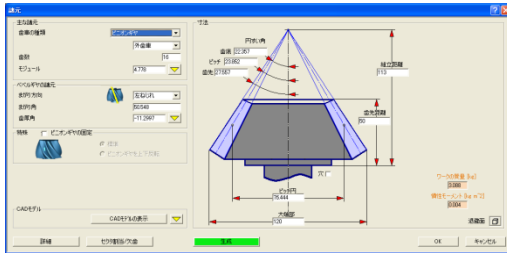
Bevel gear dimension (Carl Zeiss)
